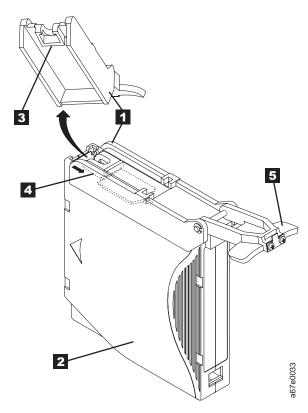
Attaching the leader pin attach tool to the cartridge. To hold the cartridge door open, hook the tool into the door and pull the tool back.
